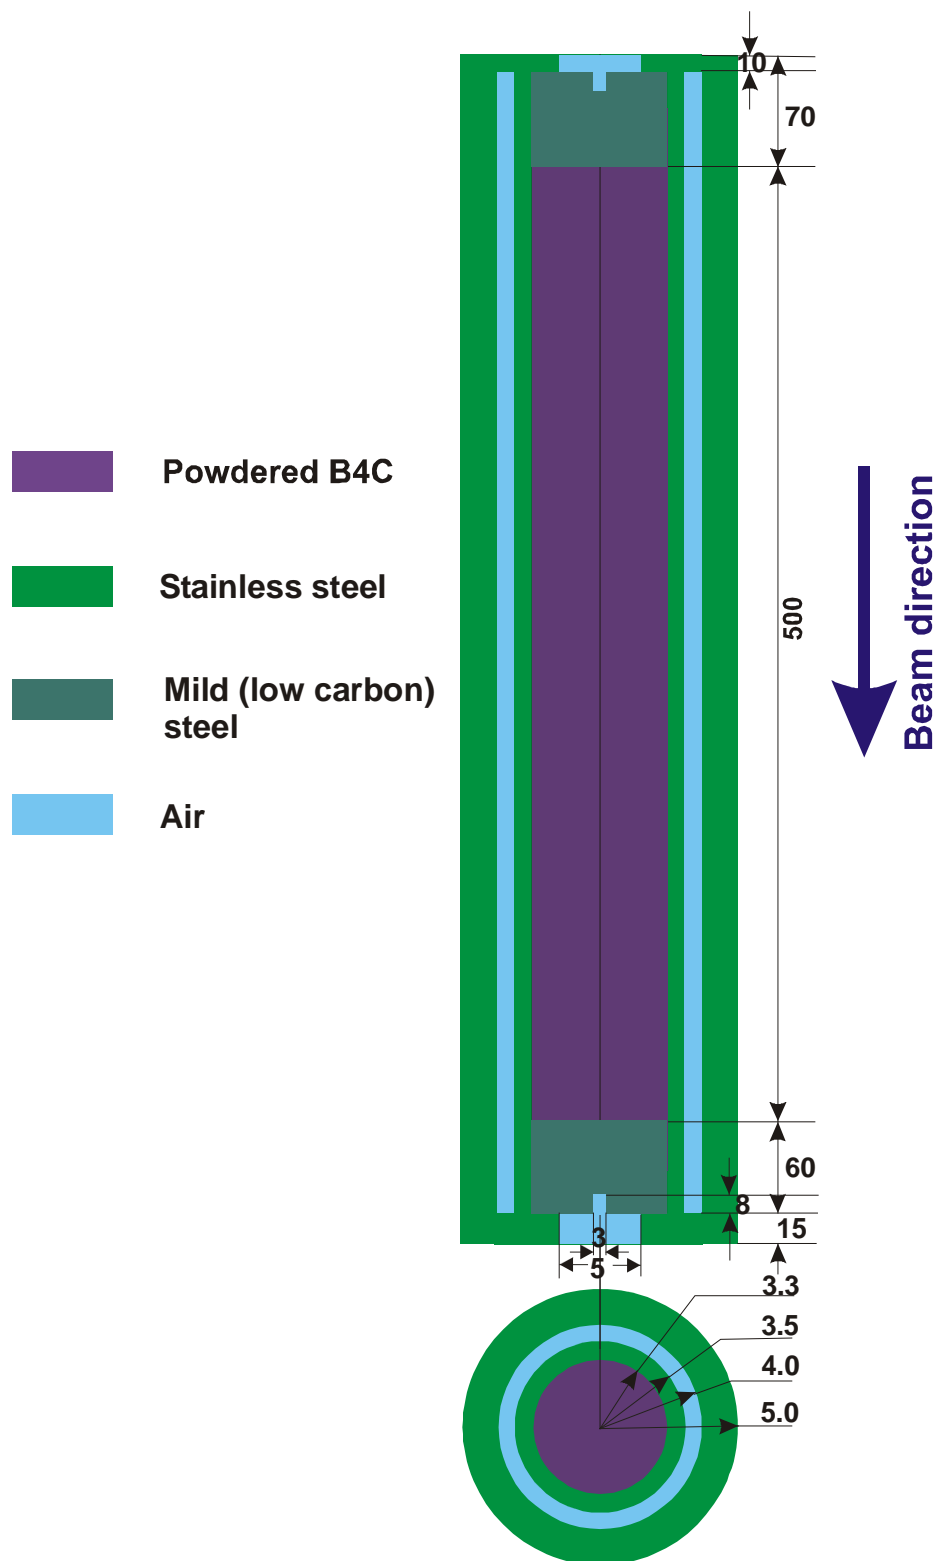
Cross-section view of the boron-carbide rod, dimensions in mm.
